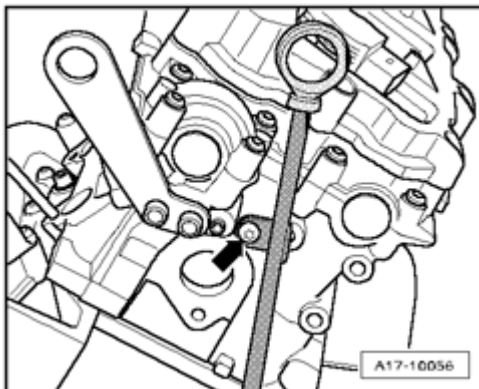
Removing Bolt And Pulling Oil Dipstick Guide Tube Upward And Out
